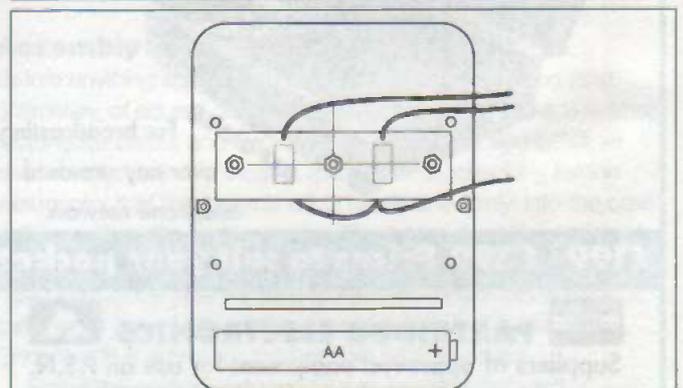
Inside of the the case lid, showing the approximate position of the Veroboard supporting the microswitches, the wiring to the switches, and the bolts securing the board to the case lid.
